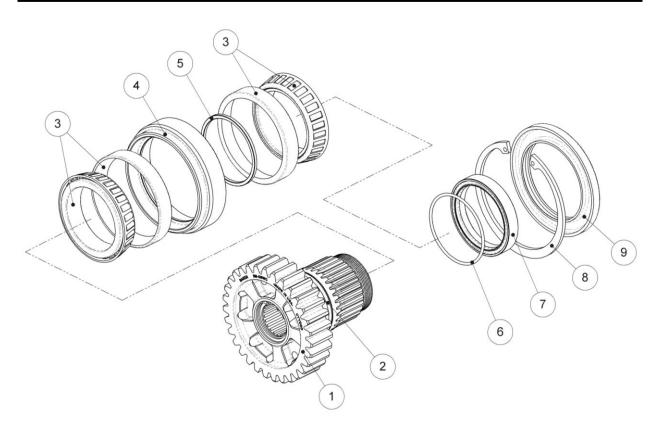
| EXPLODED VIEW, TAPERED ROLLER BEARING
